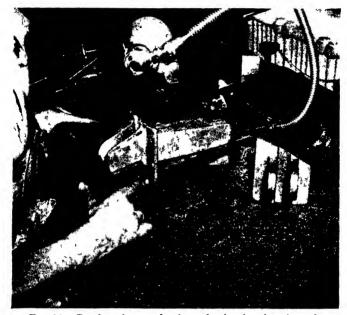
Band-sawing an aluminum forging for aircraft work
